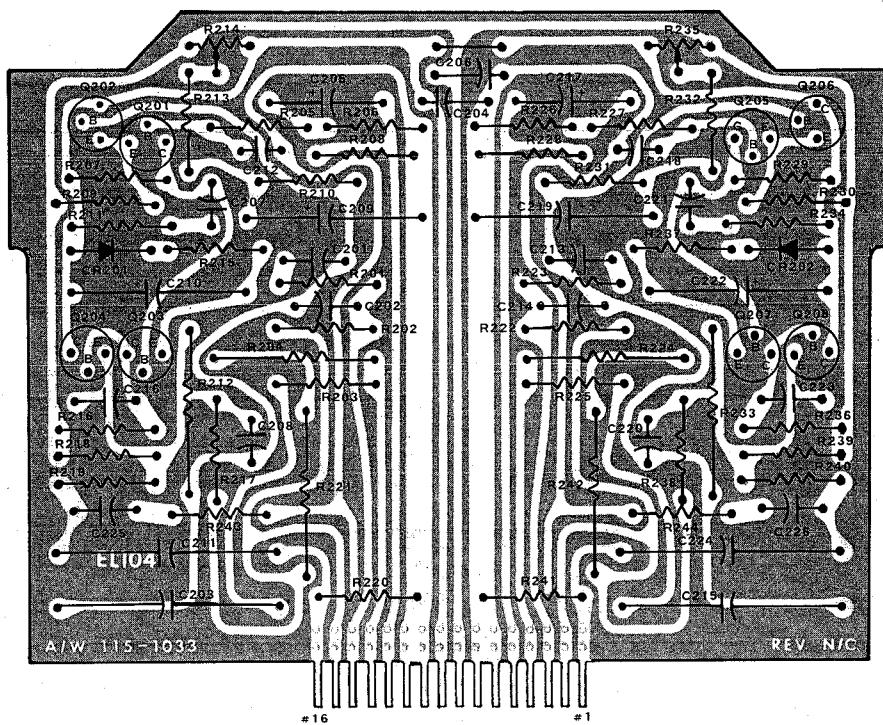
Phono Amplifier Board – A2 Component Assembly Diagram
